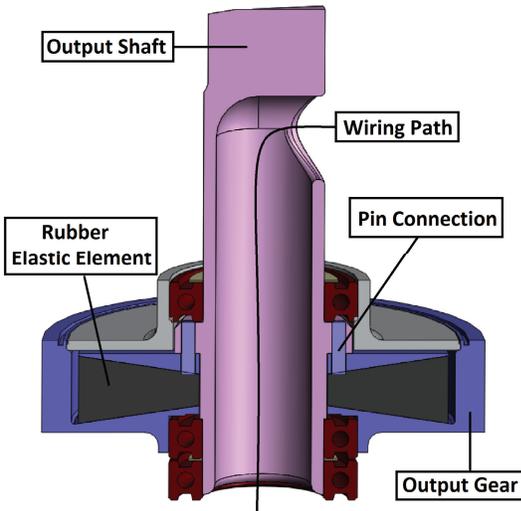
CAD model cross-section of a module's output shaft assembly. The rubber is bonded to the tapered surfaces of the output gear and top washer. The output shaft is hollow, allowing wires to pass through the center of rotation of the module. A series of dowel pins transfers torque from the spring to the output shaft.
